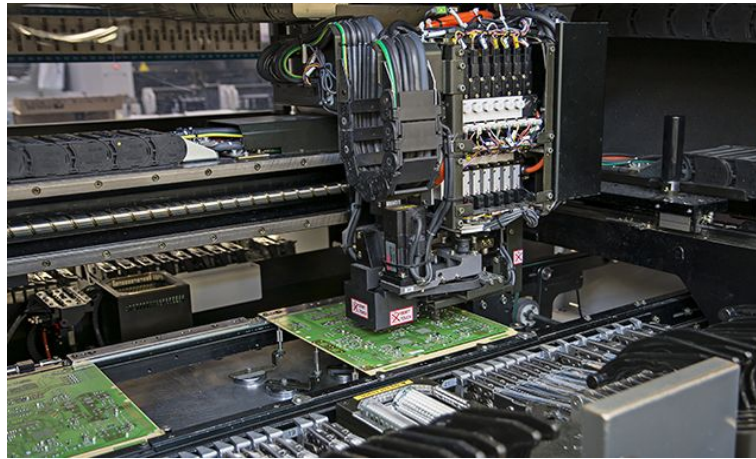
PCB Assembly Zone at SinerjiNat
